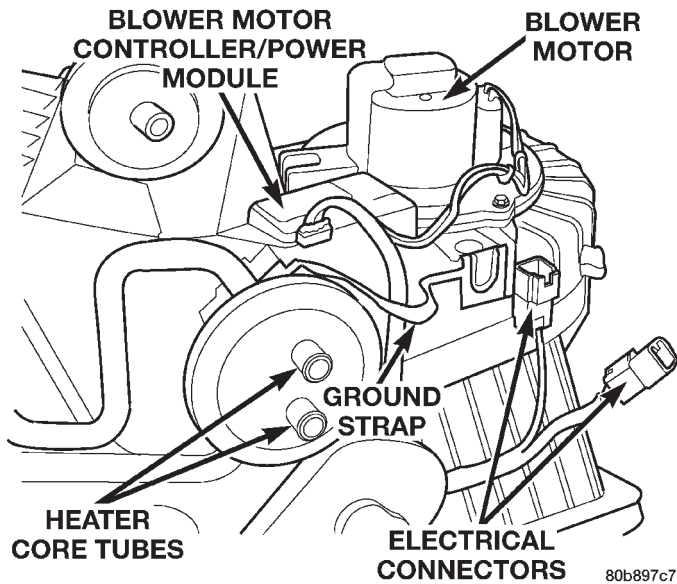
Blower Motor Resistor or Controller/Power Module Remove/Install
